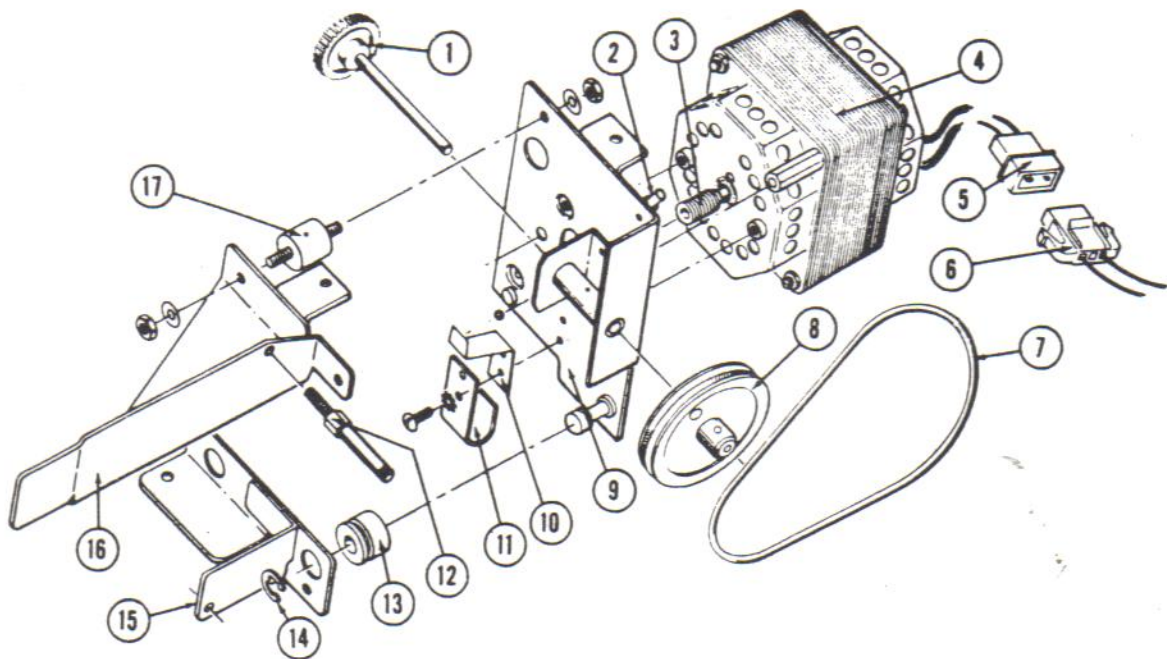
TURNTABLE MOTOR AND GEAR SHAFT ASSEMBLY
